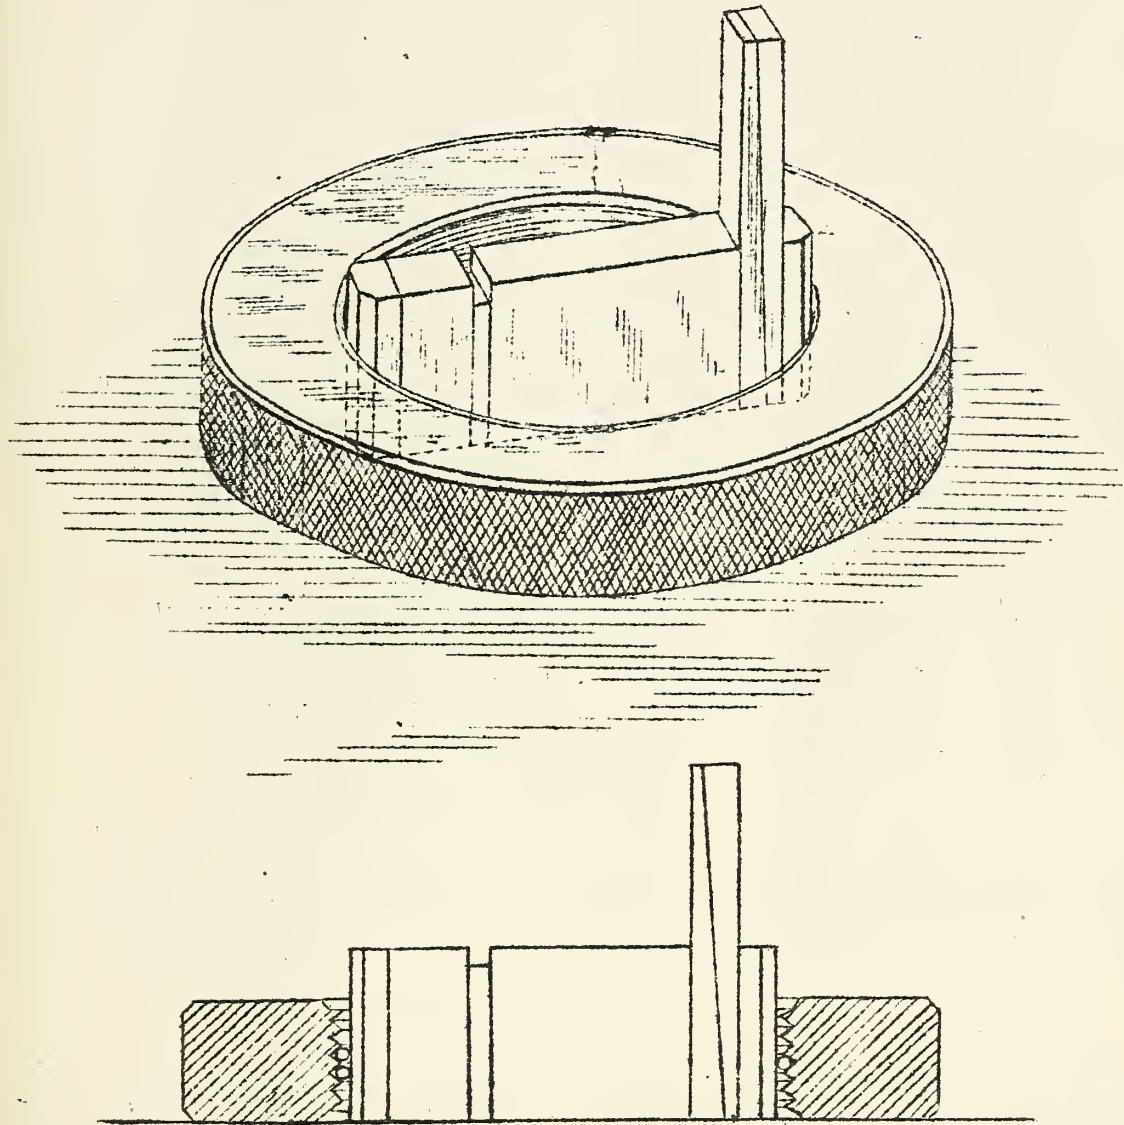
Three Ball Method of Measuring Threaded Ring Gages
